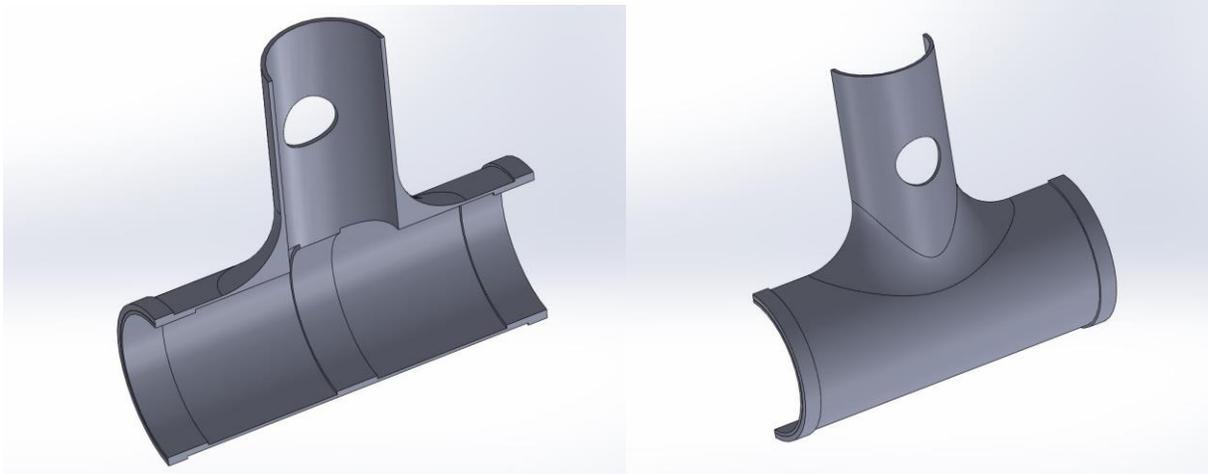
Two piece mount system shut by clamps around exterior and 1 inch nut and bolt through pipe.
